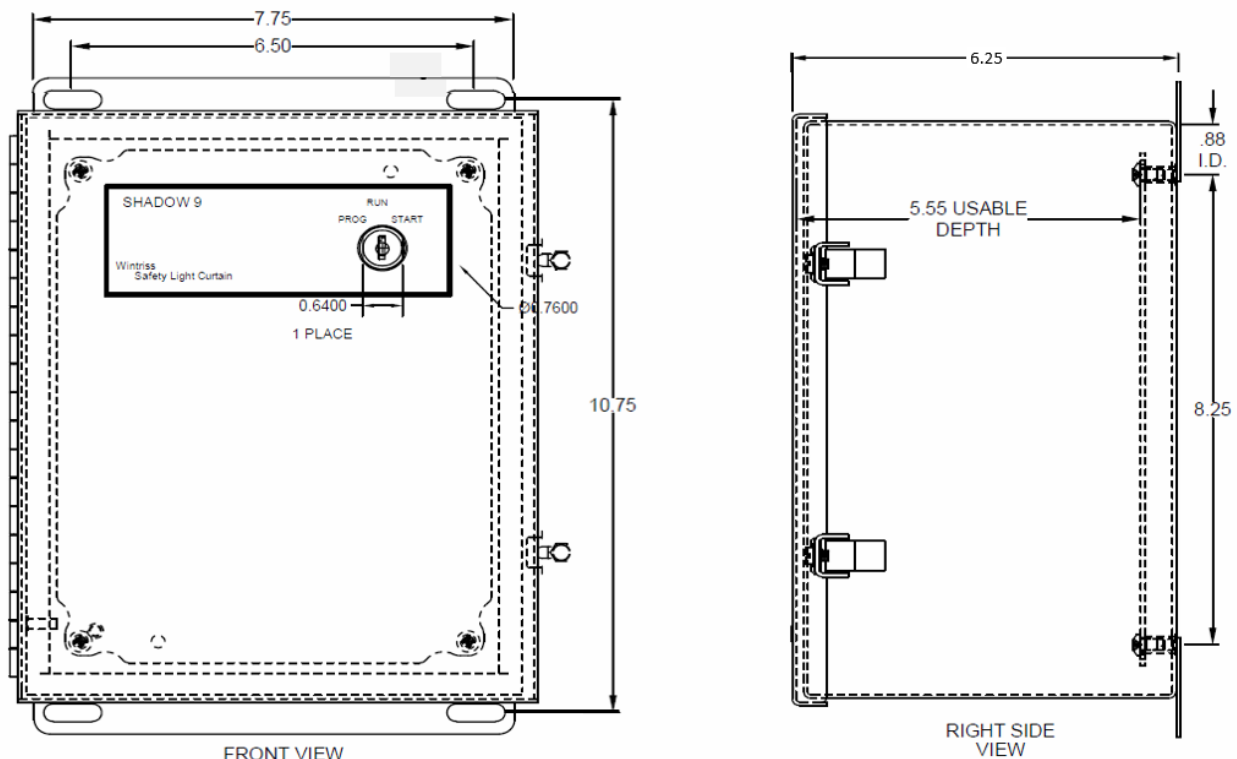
Shadow 9 Alternate Control Box: Mounting Dimensions
